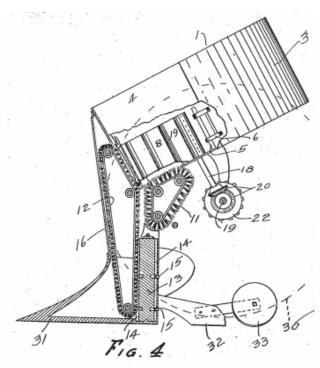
shows a sectional side elevation view of Gould's plant-setting machine. *Id.* at 1:38.
